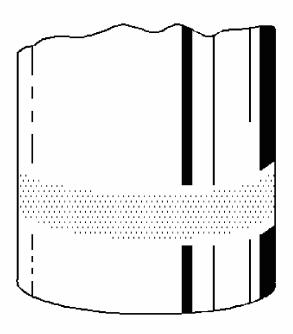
Identifying Smears Courtesy of GENERAL MOTORS CORP.
